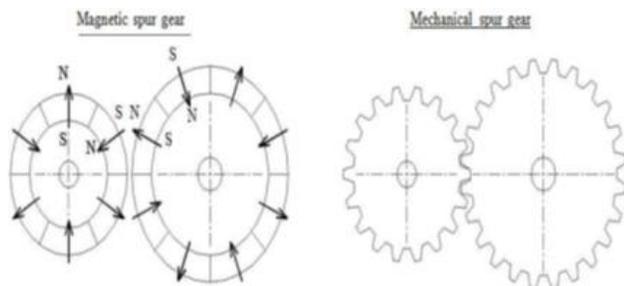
Magnetic spur gear with magnets and mechanical spur gear
